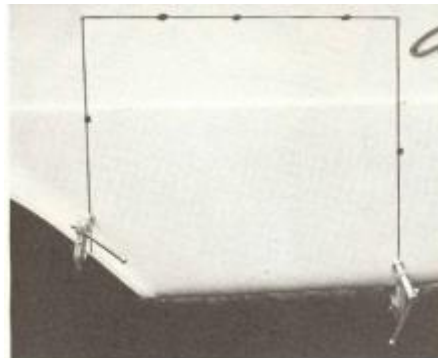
43 Section of service panel is then held in position with clamps while it is welded in place.
